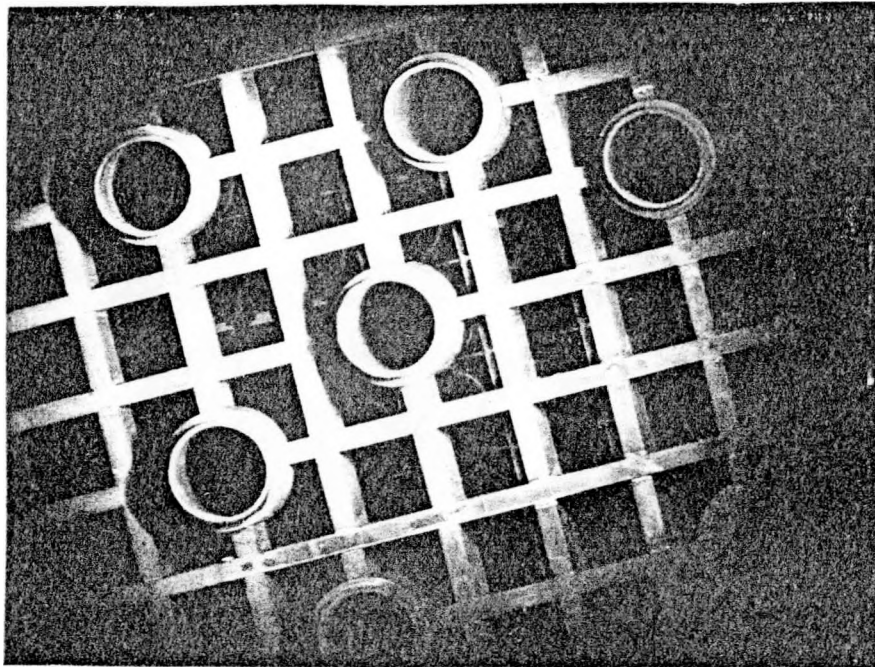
Photograph of Top Nozzle of Connecticut Yankee Fuel Assembly S004, Which Shows the Top End of the Control Rod Guide Tubes. Assembly End Fittings and Spacer Grids Had Good Integrity.
